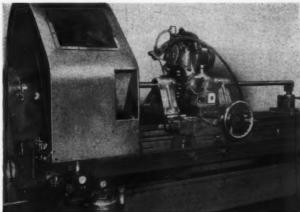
Set up for cutting the thread in the cross-slide traversing screw for a Butler No. 7A planer, on a Binns & Berry thread-whirling lathe equipped with a Burgsmuller head. This thread is of Acme form, 12-mm. pitch, and 2-start, and is 10 ft. long. The starts are machined separately, each in two cuts, at a traverse speed of 2½ in. per min., 0.025 in. of material per flank being removed during the second cut. The cutter head is run at 1,800 r.p.m., and is fitted with four cutters, two of 20 deg. included angle, one of 29 deg., and one for chamfering. Atomized gear cutting oil is applied as a coolant
